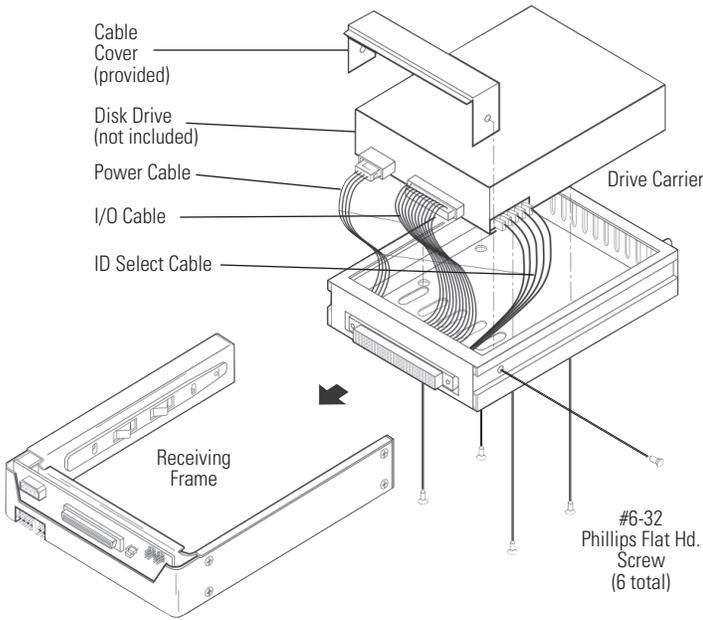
Drive Installation Assembly DE100 SCSI Wide 68-Pin
